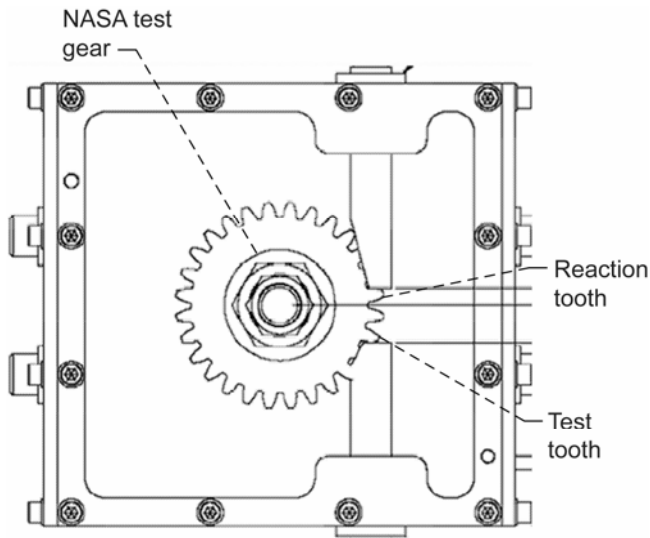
Schematic of test fixture for bending fatigue of spur gears. Note: Test tooth is loaded at the point of highest single tooth contact.
